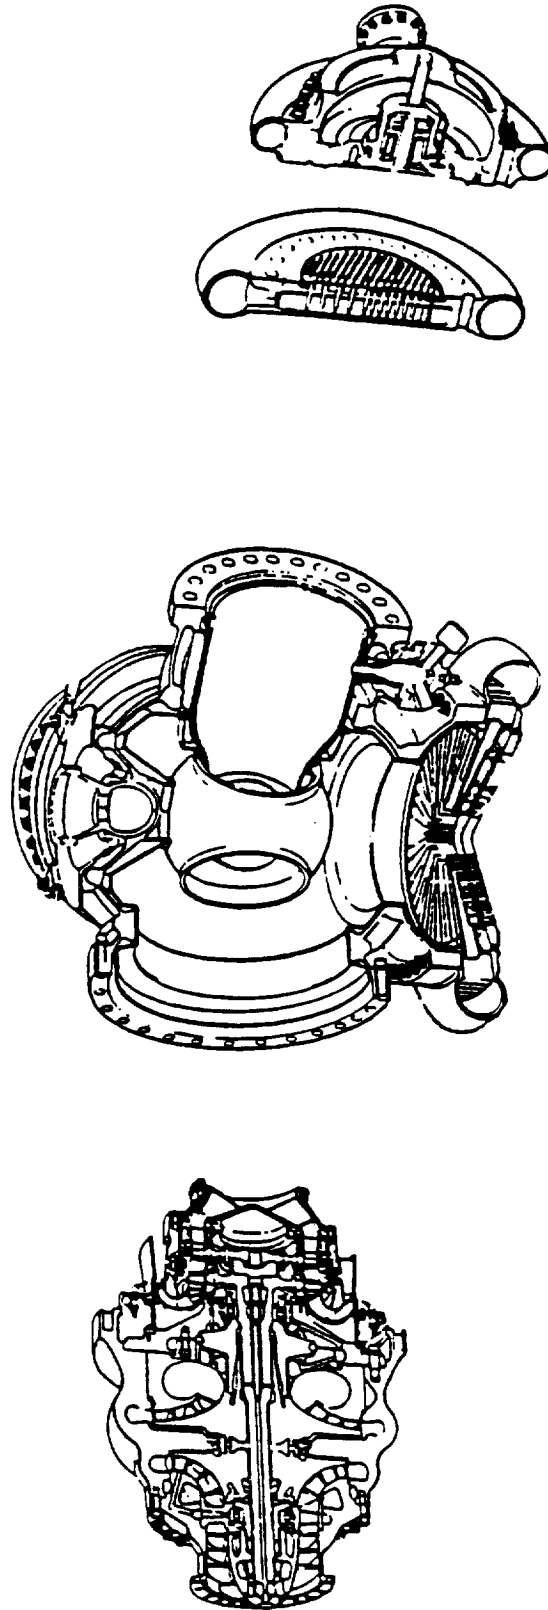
XLR129-P-1 Engine Packaging Concept
